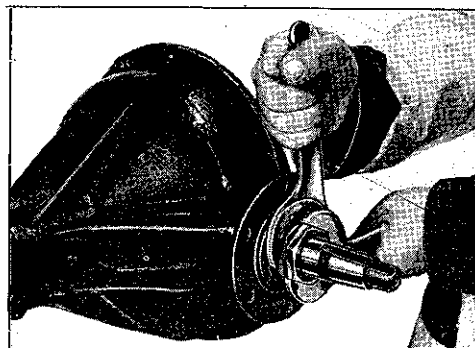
PINION BEARING ADJUSTING WRENCHES
